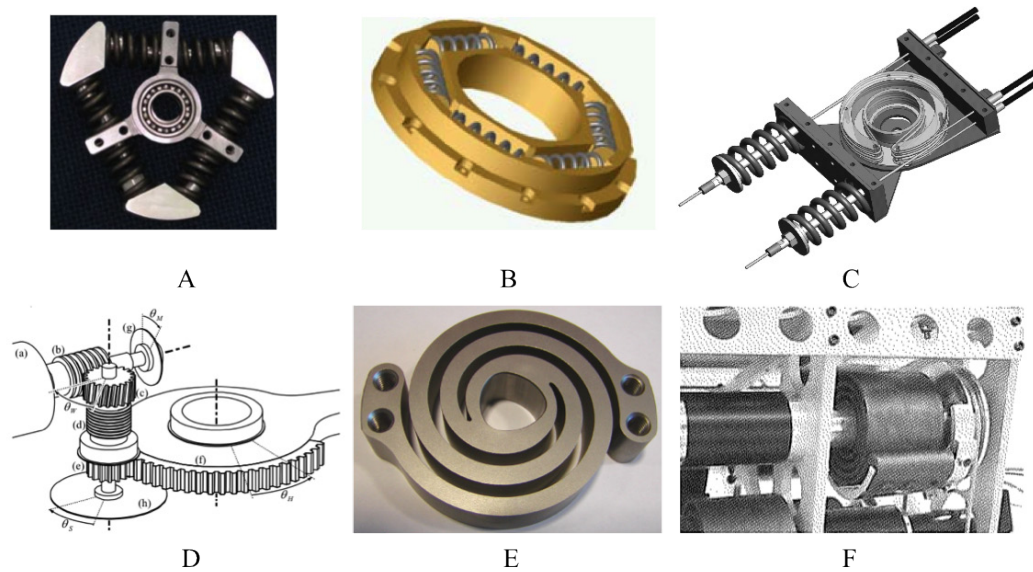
Compliant components for rotary SEA prototypes: [86] (A), [87] (B), [99] (C), [85] (D), [89] (E), [91] (F).
